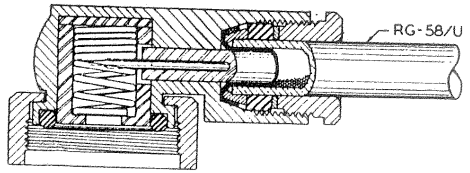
Connector, Plug (D-C Plug P-101)
